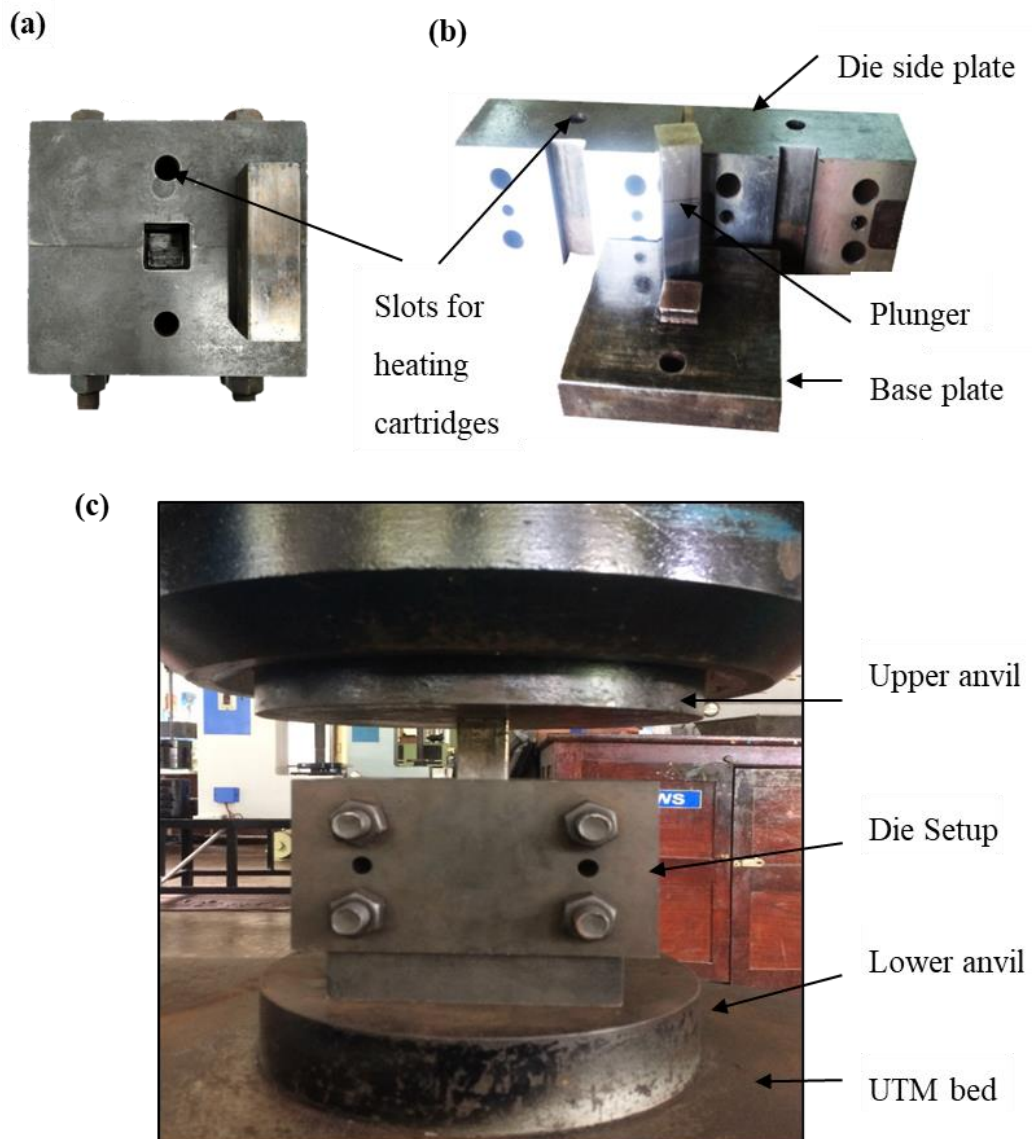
MAF die setup in (a) the assembled and (b) the exploded view, (c) assembled die setup on UTM bed.
